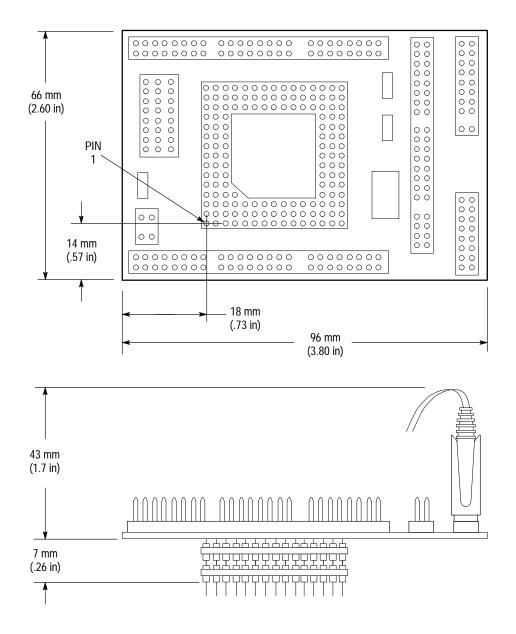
Minimum clearance of the 68340 PGA probe adapter
